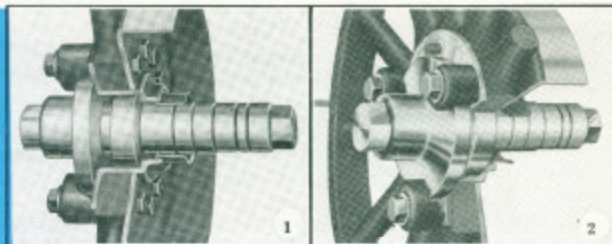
Illustration No. 1 shows a wheel hub mounted on the self-centering mandrel, face plate and annular adapter. A section of the hub has been cut away to show the application.
